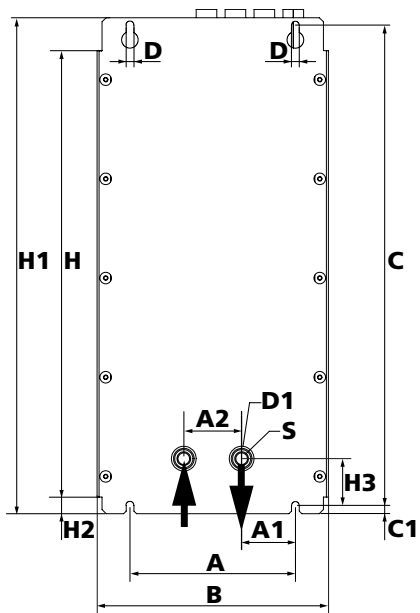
Dimensional drawing, housing with liquid cooling, schematic depiction for Size 3 to Size 6A
